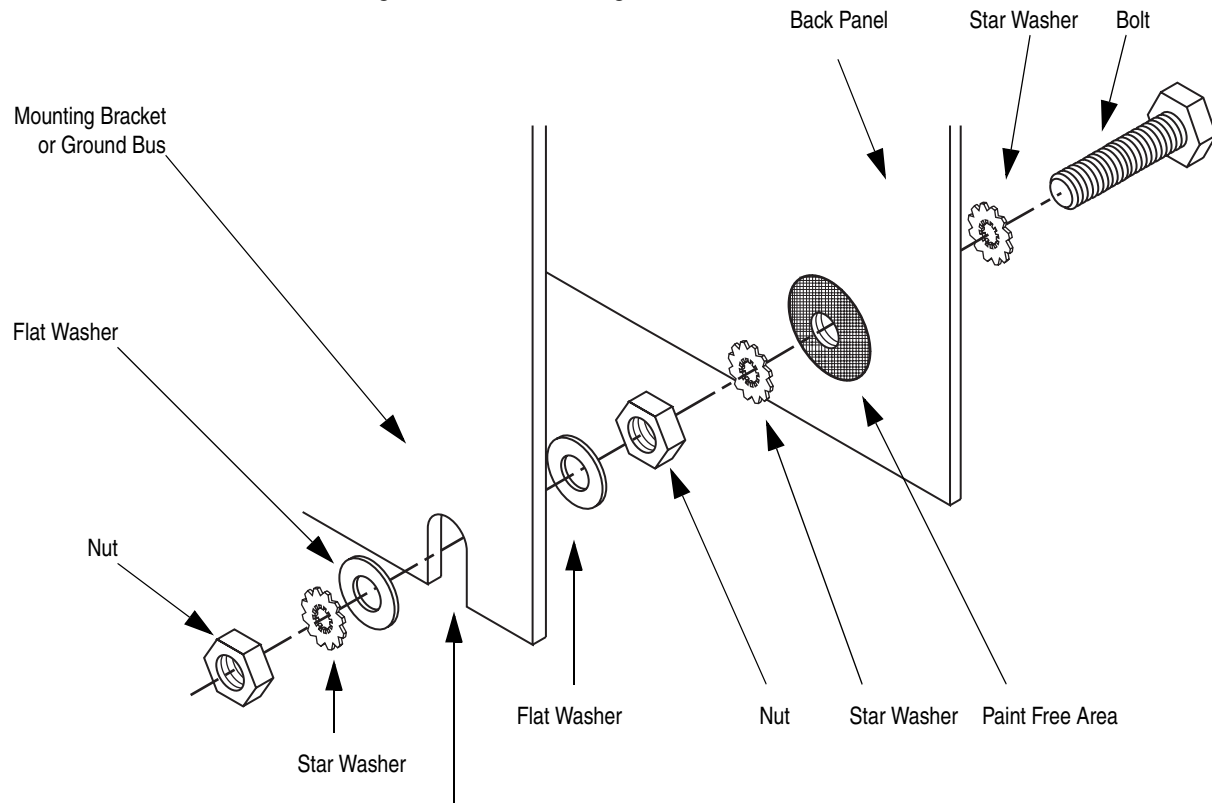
Bolt Mounting of Ground Bus or Chassis to Back Panel
